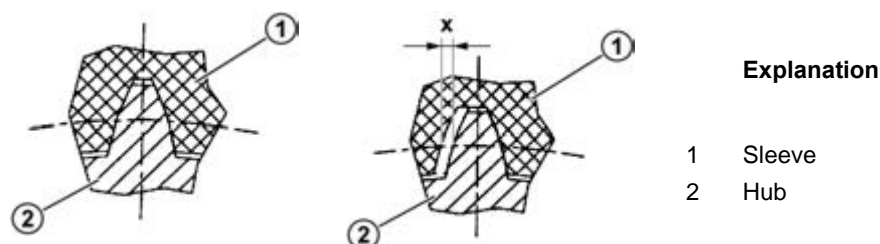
Measurement of gear sleeve wear for gear BoWex couplings®
